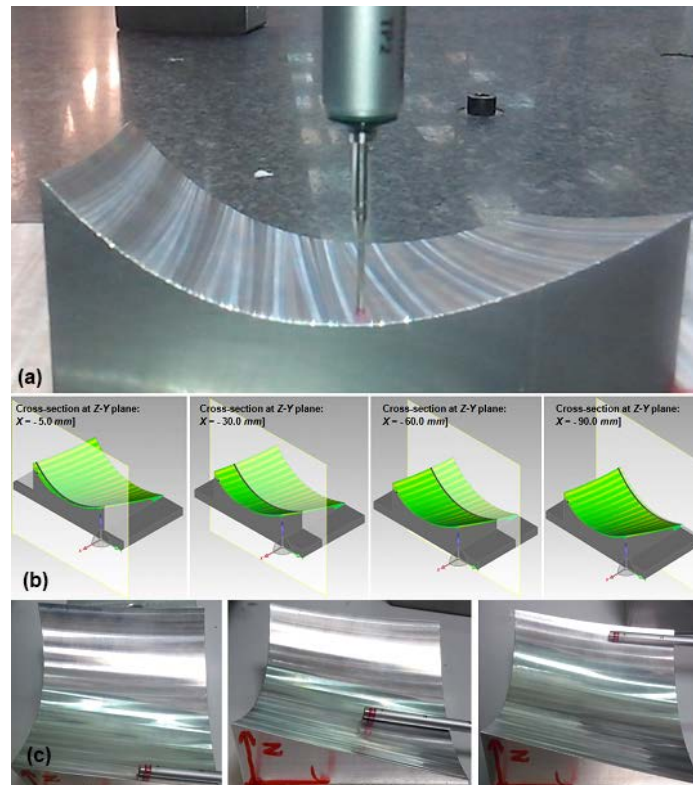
Two-fold inspection process for the machined surface: (a) CMM inspection equipment; (b) cross-sections for CMM inspection, X=-5mm; X=-30mm; X=-60mm and X=-90mm; (c) Form error testing approach using a roughness tester travelled on three machining strips.
